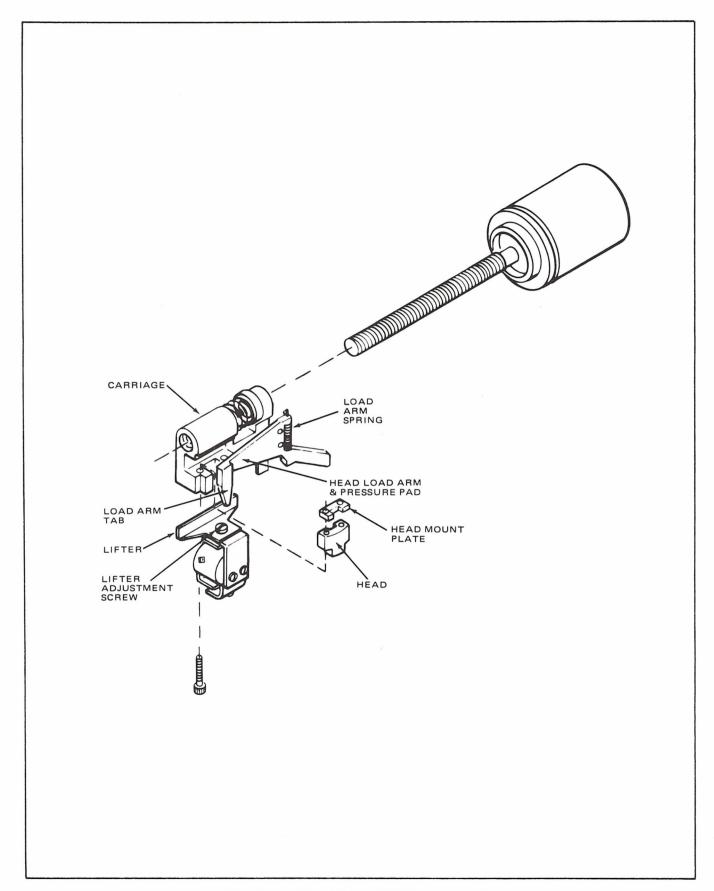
HEAD LOAD ACTUATOR ASSEMBLY
